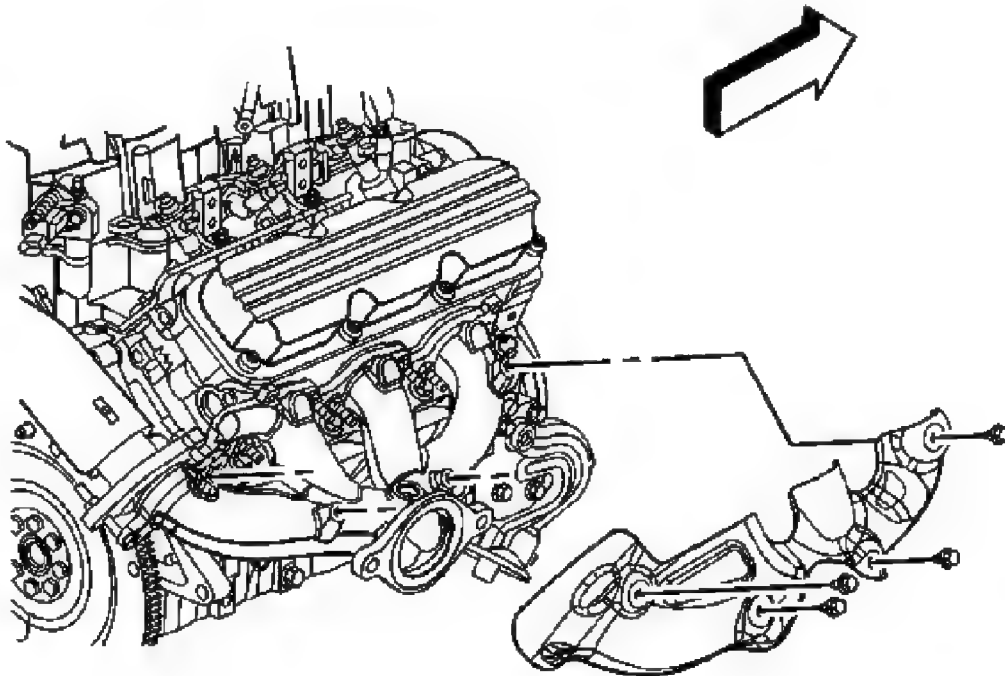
View Of Exhaust Manifold Heat Shield Bolts & Shield
